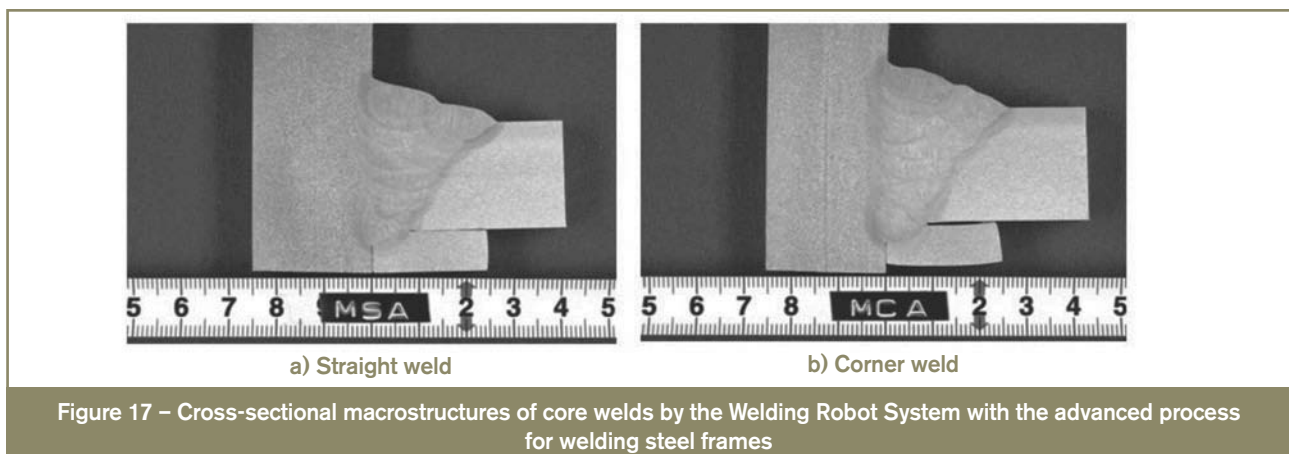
Cross-sectional macrostructures of core welds by the Welding Robot System with the advanced process for welding steel frames
